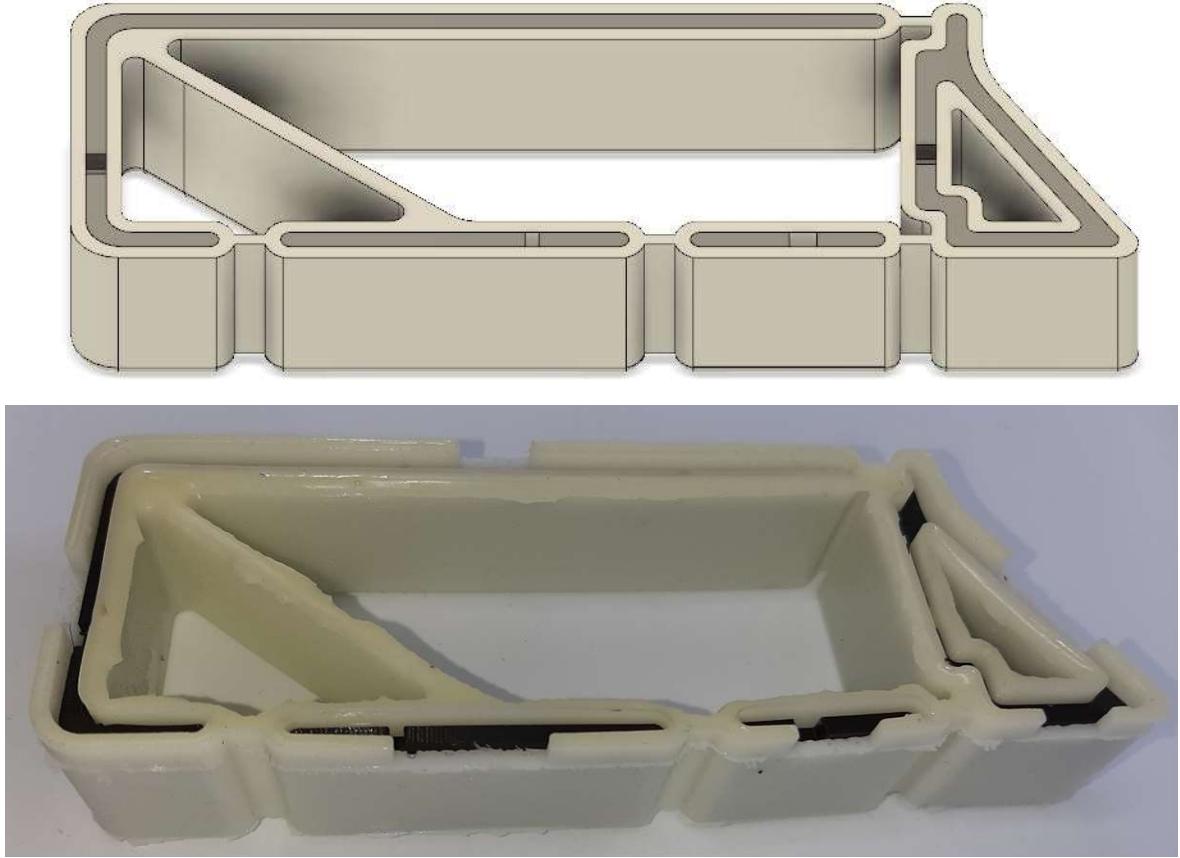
Design Iteration 2 – CAD and Prototype of Soft gripper design
